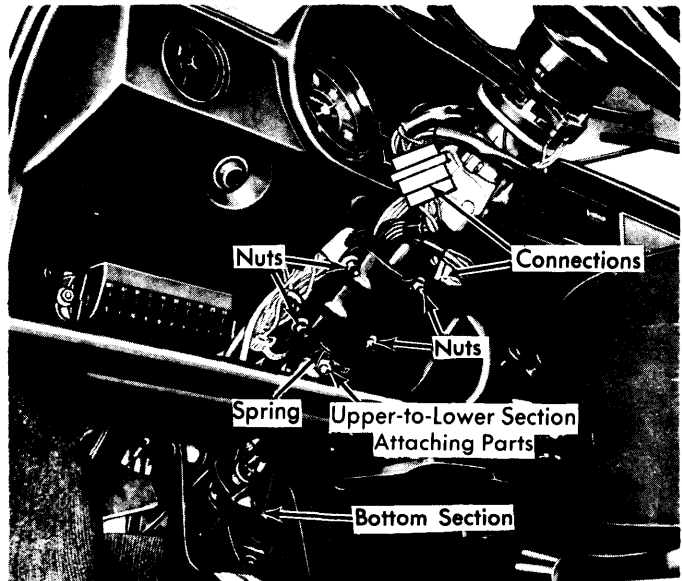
Installed View of Typical Steering Column as Viewed from Under Instrument Panel
